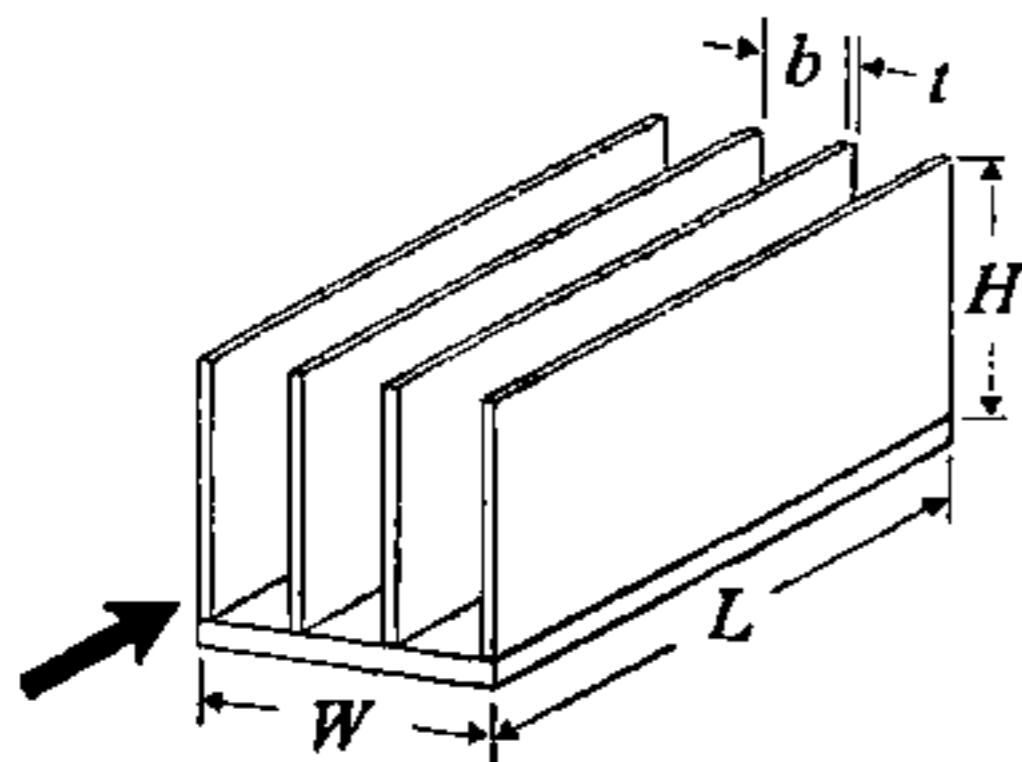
Schematic of Plate Fin Heat Sink Geometry
